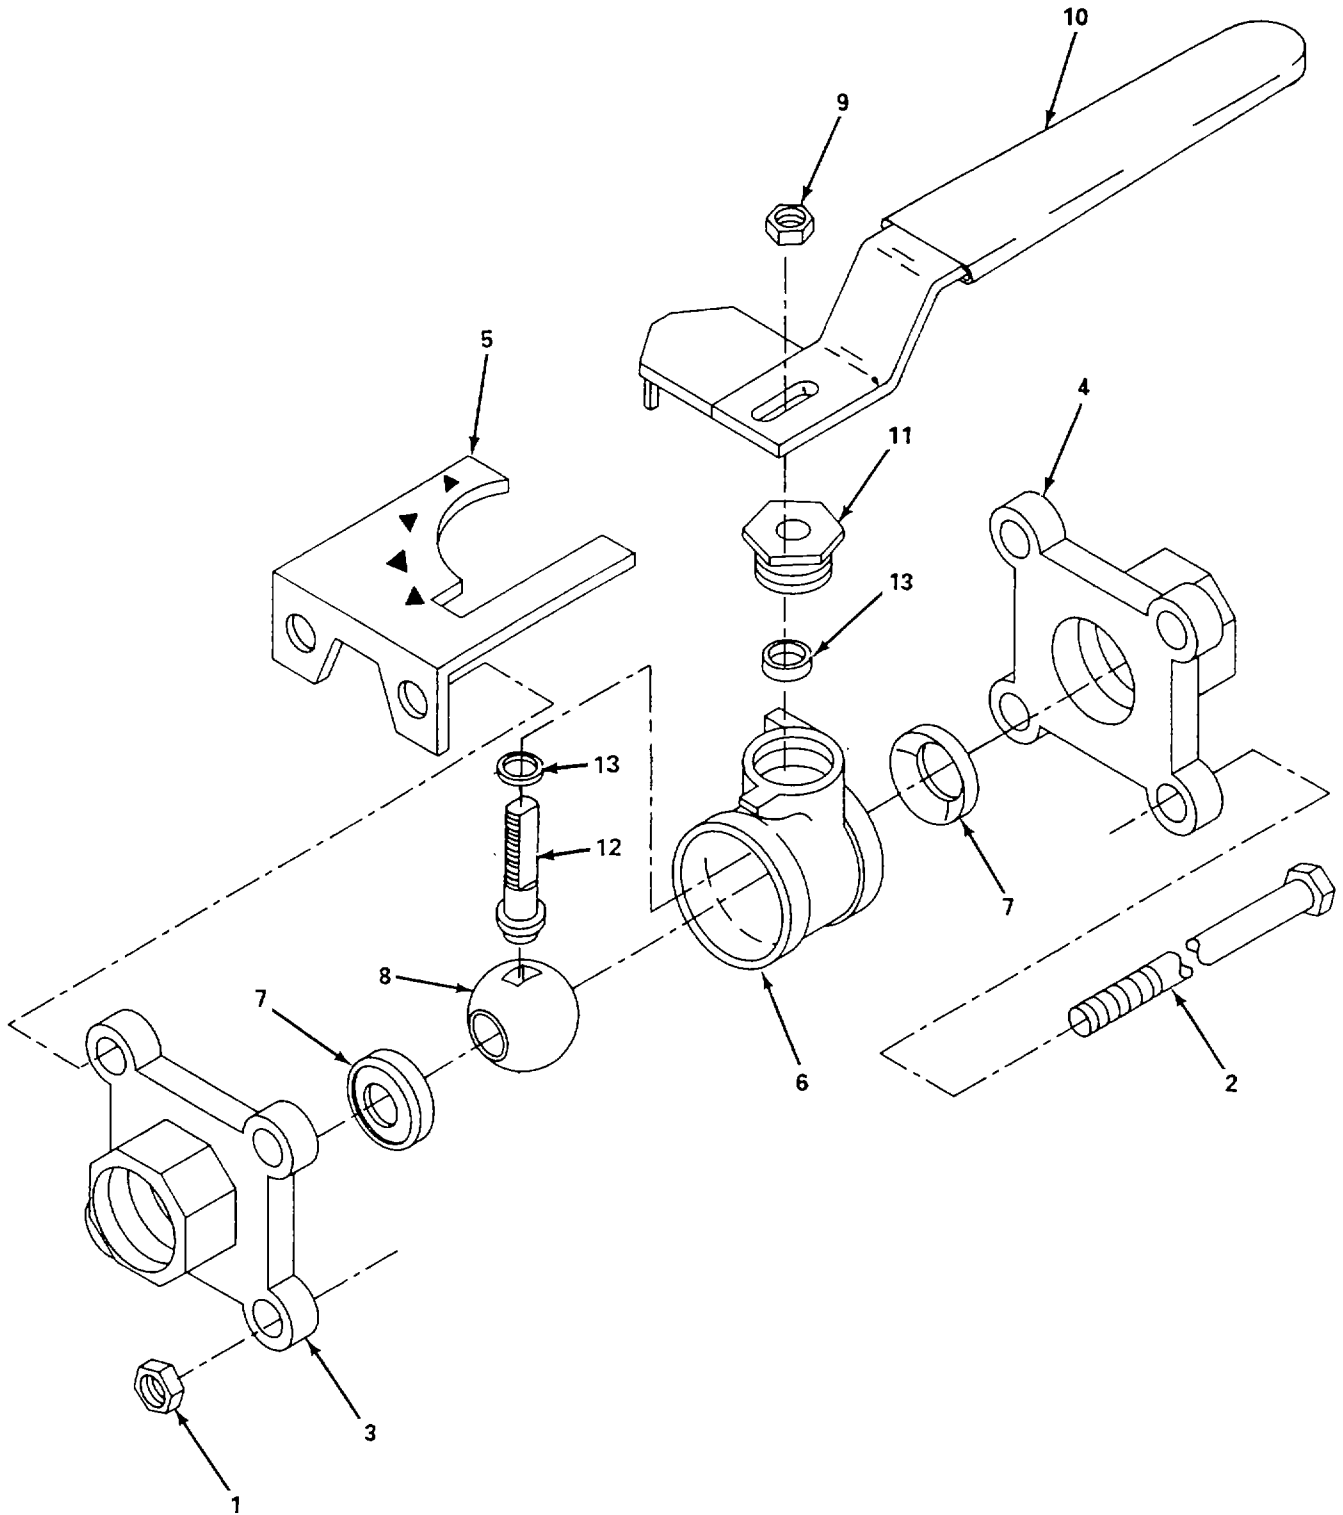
Ball Valve 1 1/4 Inch, Repair.
